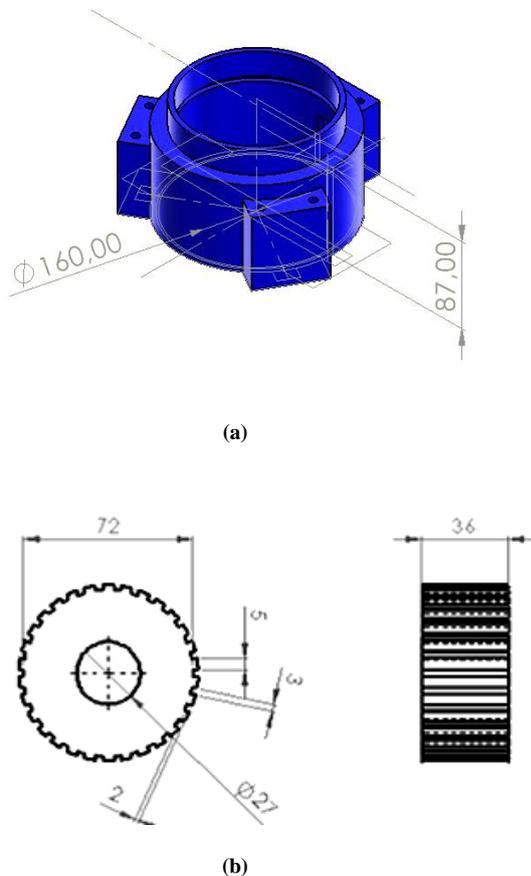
Dimensions in mm of (a) the hopper and (b) the roller
